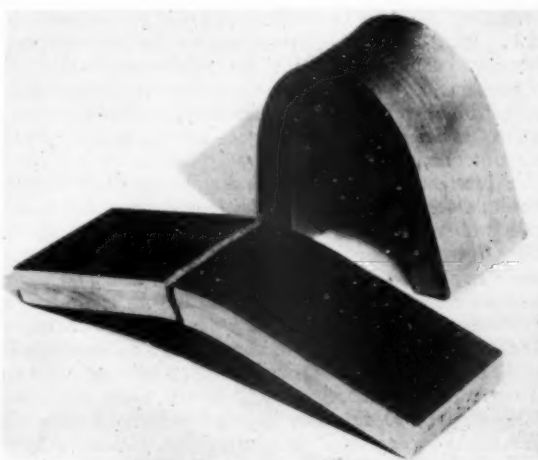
Transverse bend tests on argon arc welds in $\frac{1}{2}$ in. thick NP 6 material. Premature failure in metal with a high gas content.
